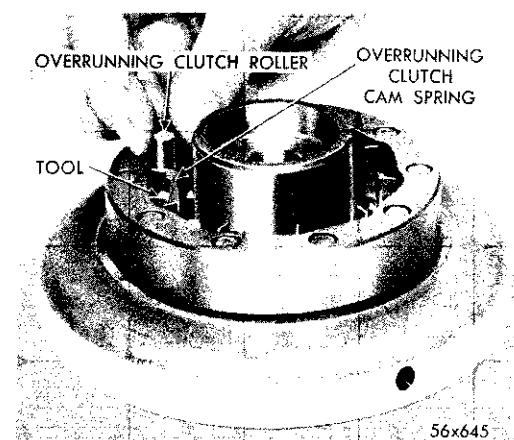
Installation of Overrunning Clutch Rollers and Springs in Intermediate Support and Cam Assembly
